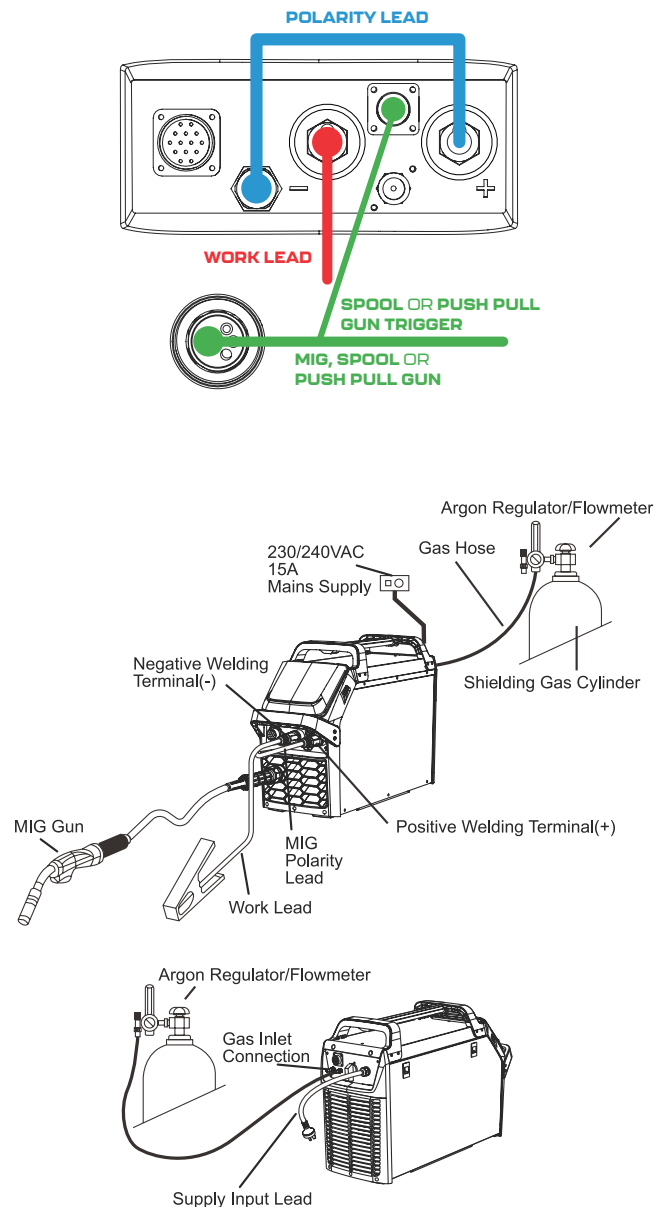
Setup for MIG Welding with Gas Shielded MIG Wire
